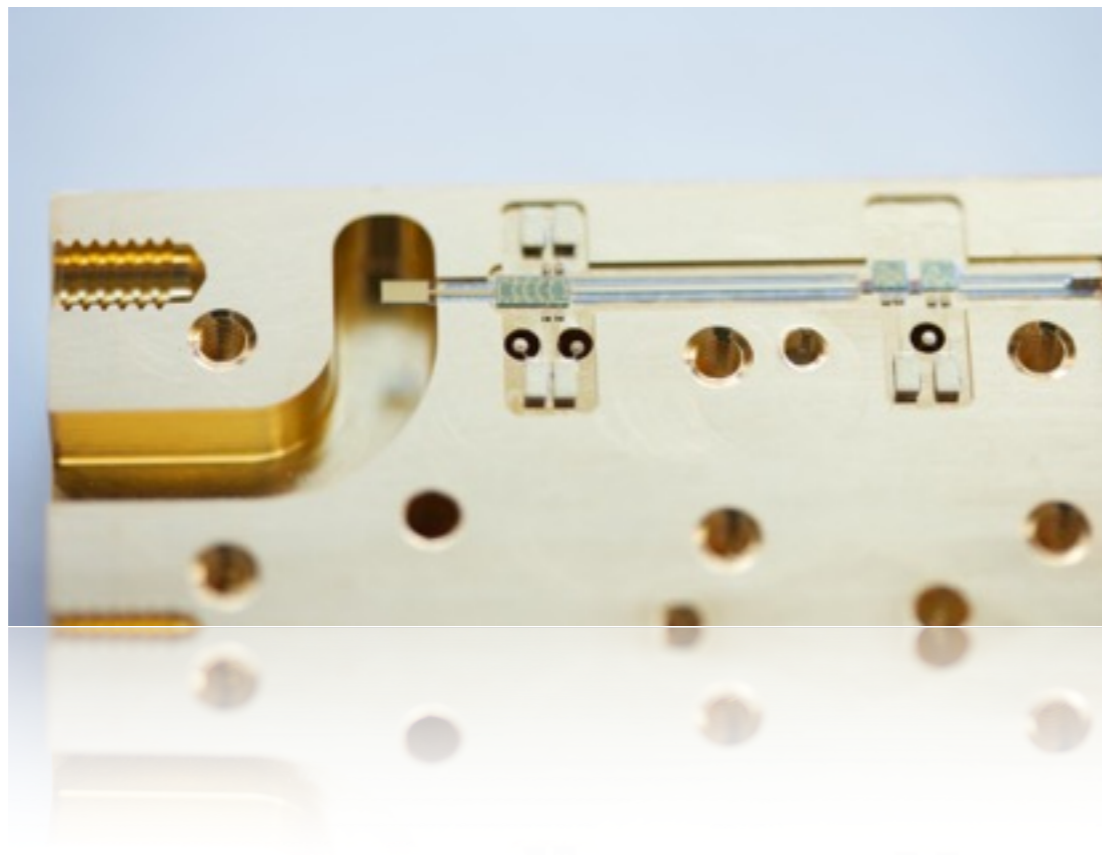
Photo of the 2SB receiver module split block assembly, the module outer dimensions are roughly 40 by 40 mm.
